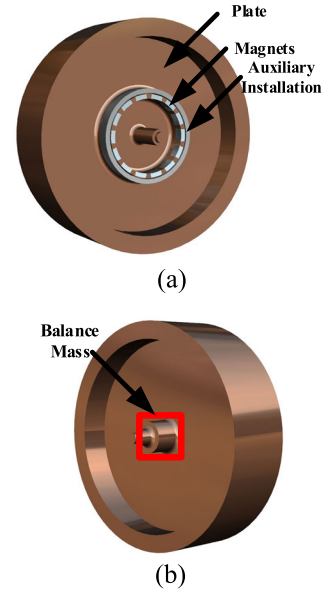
(a) The structure of the flywheel BLDC-coupled flywheel, (b) The design of balance mass.
